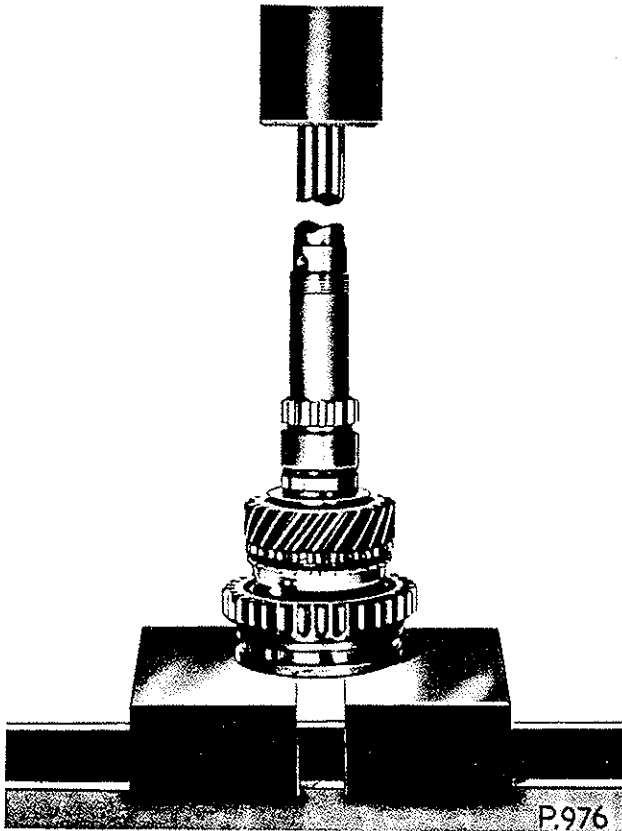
Refitting the 3rd and 4th synchro hub assembly
